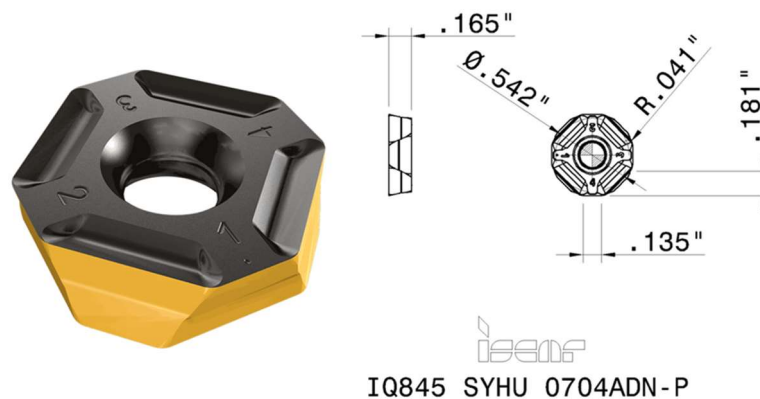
Technical dimensions of the milling insert<sup>83</sup>
